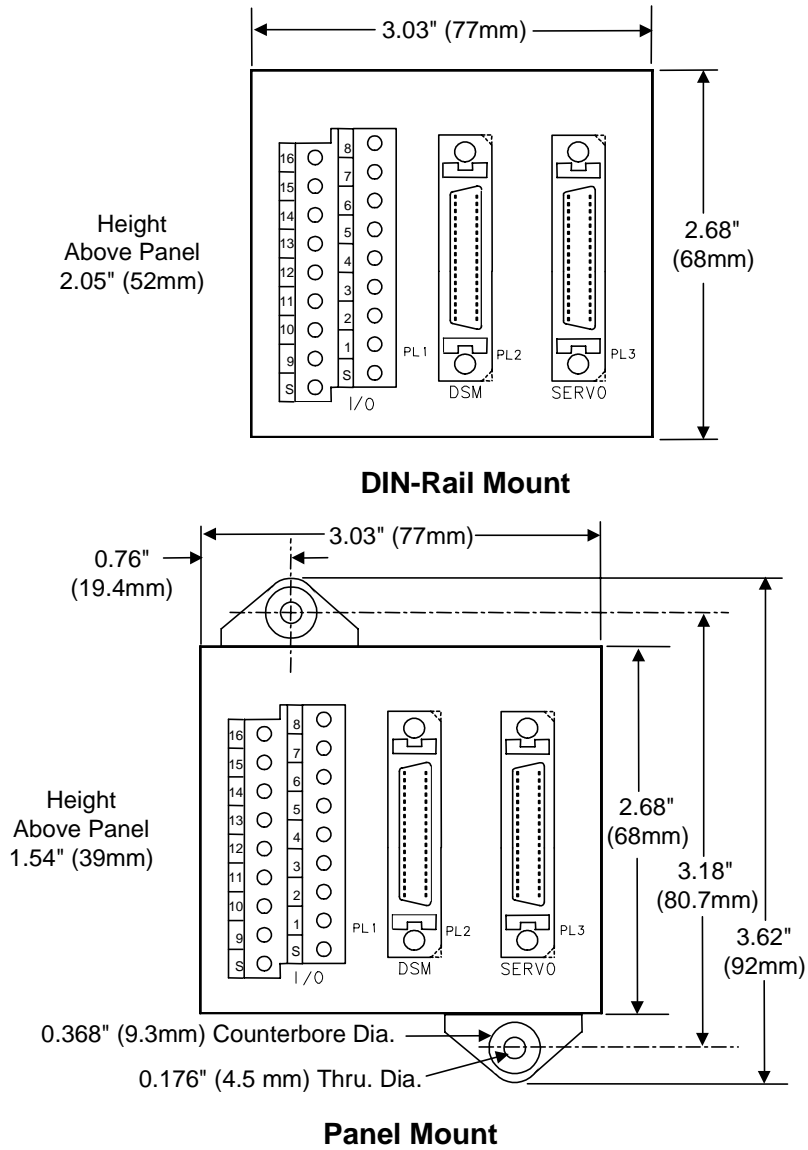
IC693ACC335 Digital Axis Terminal Board Mounting Dimensions
